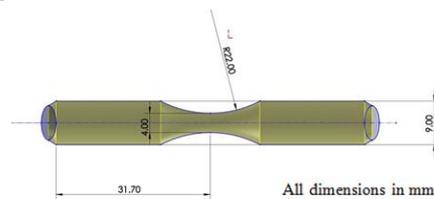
Schematically representation of fatigue test specimens on the base of ASTM E466.
